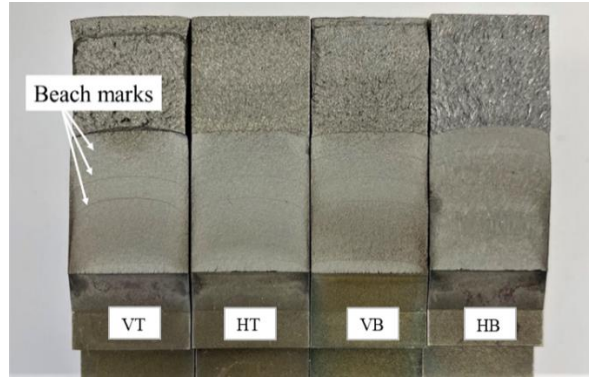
The beach marks on fracture surface of WAAM ER70S-6 C(T) specimens tested in air
